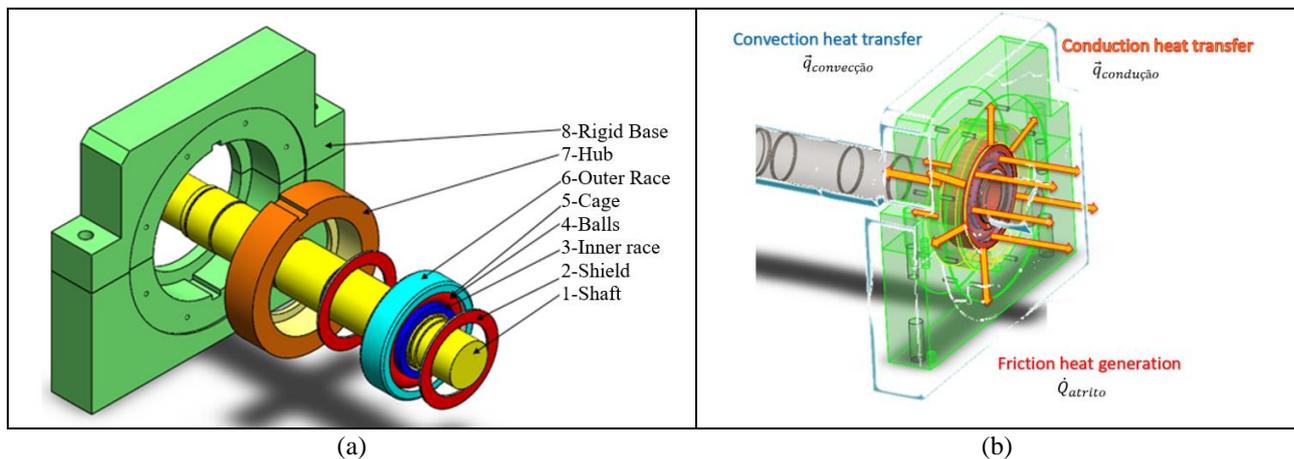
(a) Components of a housing bearing. (b) analysis of heat transfer in a housing bearing.
